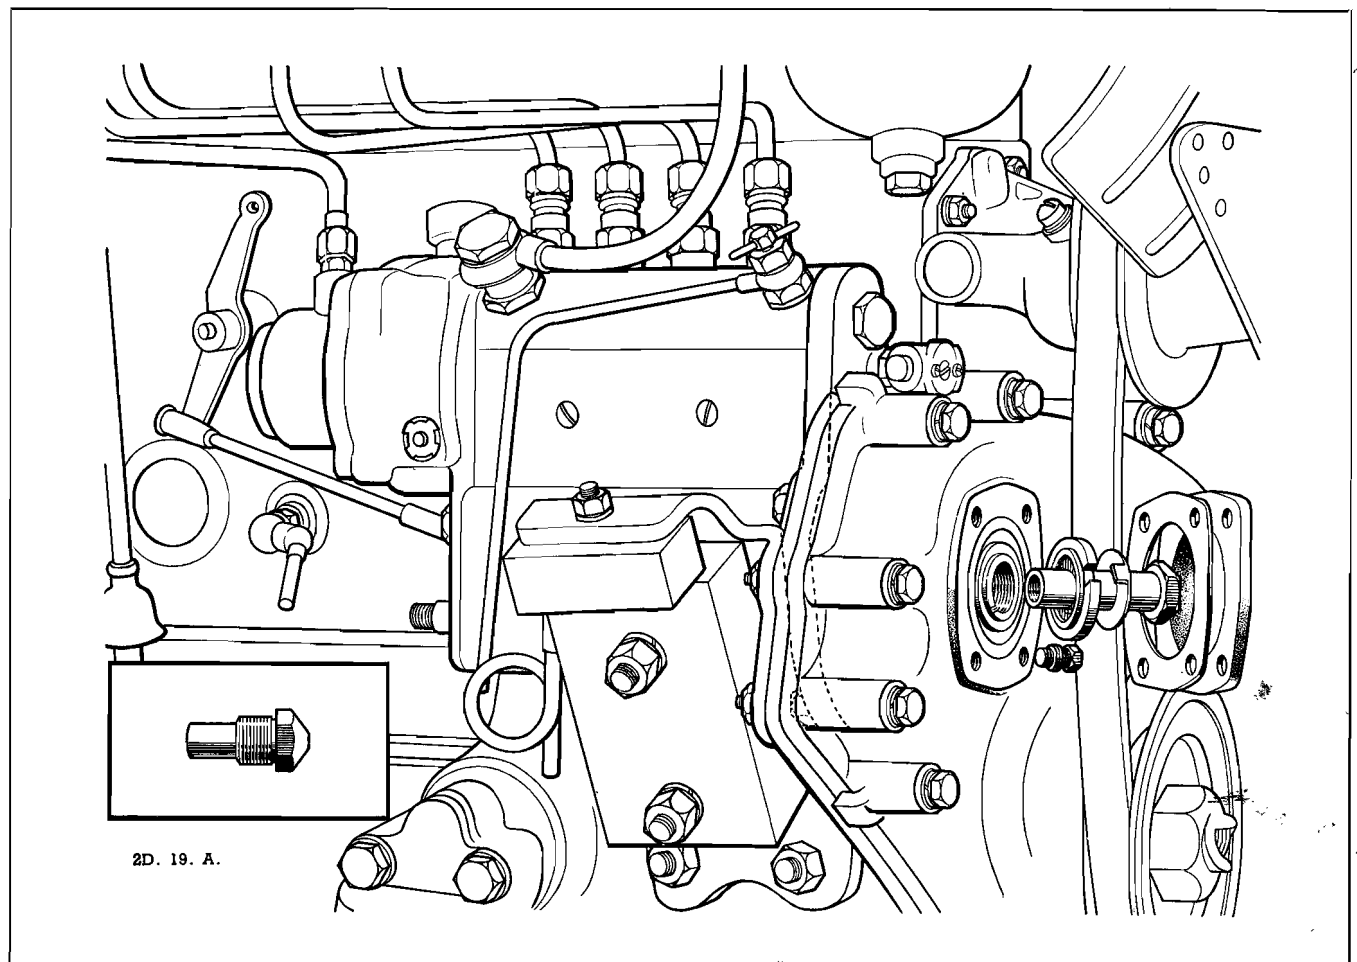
Fuel injection pump removal, showing tool No. 1F.8337 inset.
